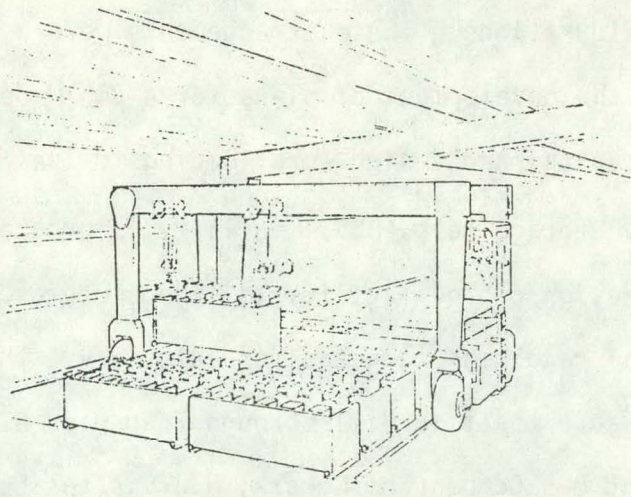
CELL HANDLING EQUIPMENT FOR A SINGLE-LAYER
